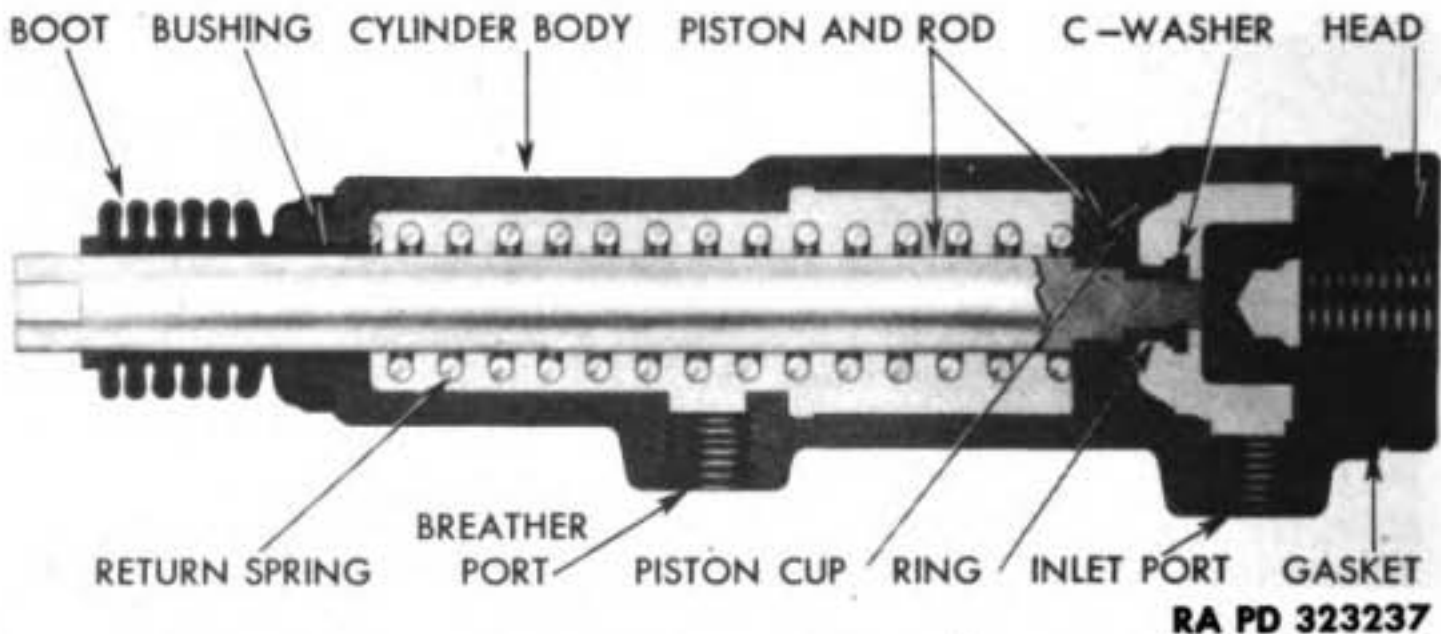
Cross-section of Electric Brake Controller Power Cylinder
